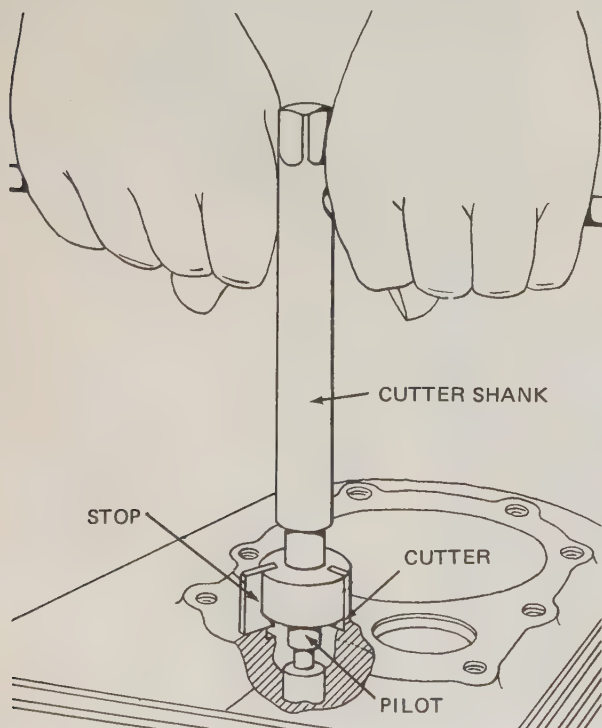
Counterboring for the valve-seat insert. (Briggs & Stratton Corporation)
